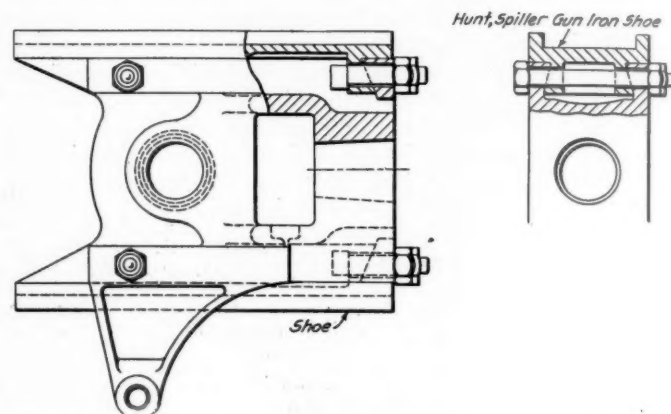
Shoe Fastening as Applied to Crosshead with Piston Rod Held by a Nut
